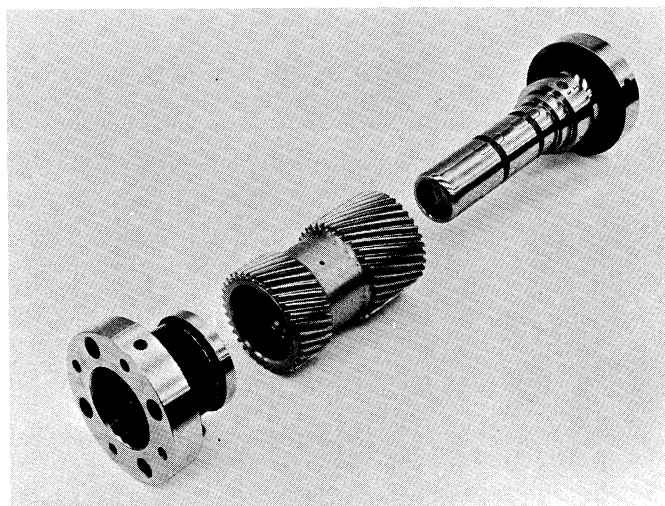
A Red Ring expanding arbor with two sets of clamping jaws for mounting transmission sun gears on a rotary gear shaver.
